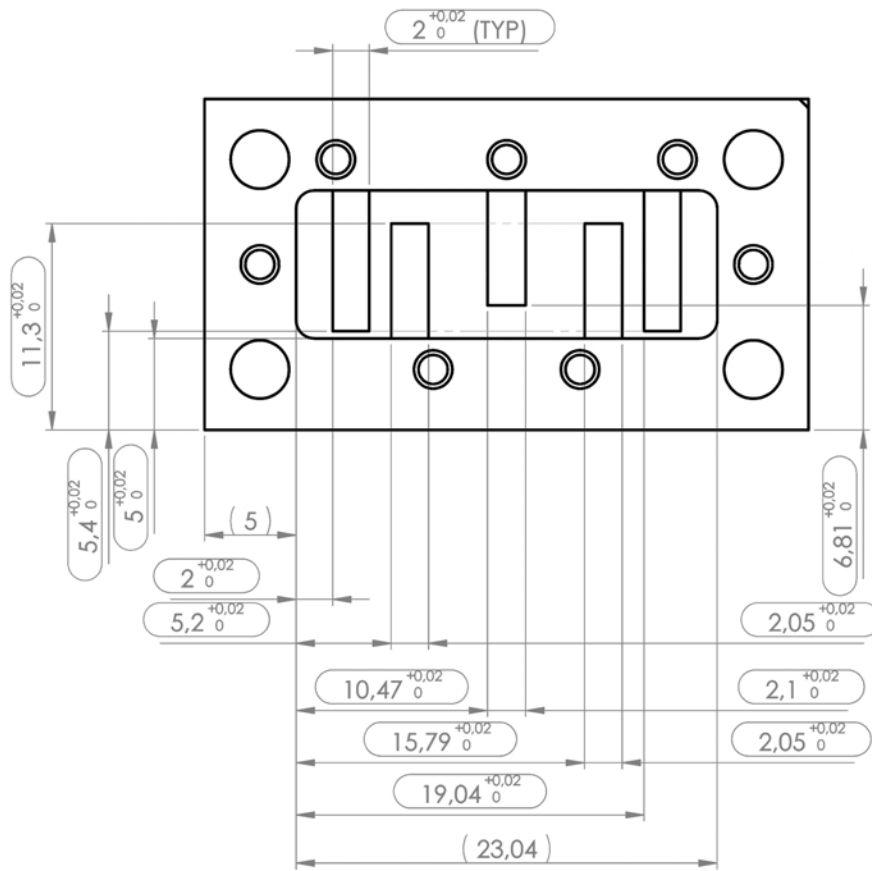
Filter 3 (Version 3), Dimensions (a).
